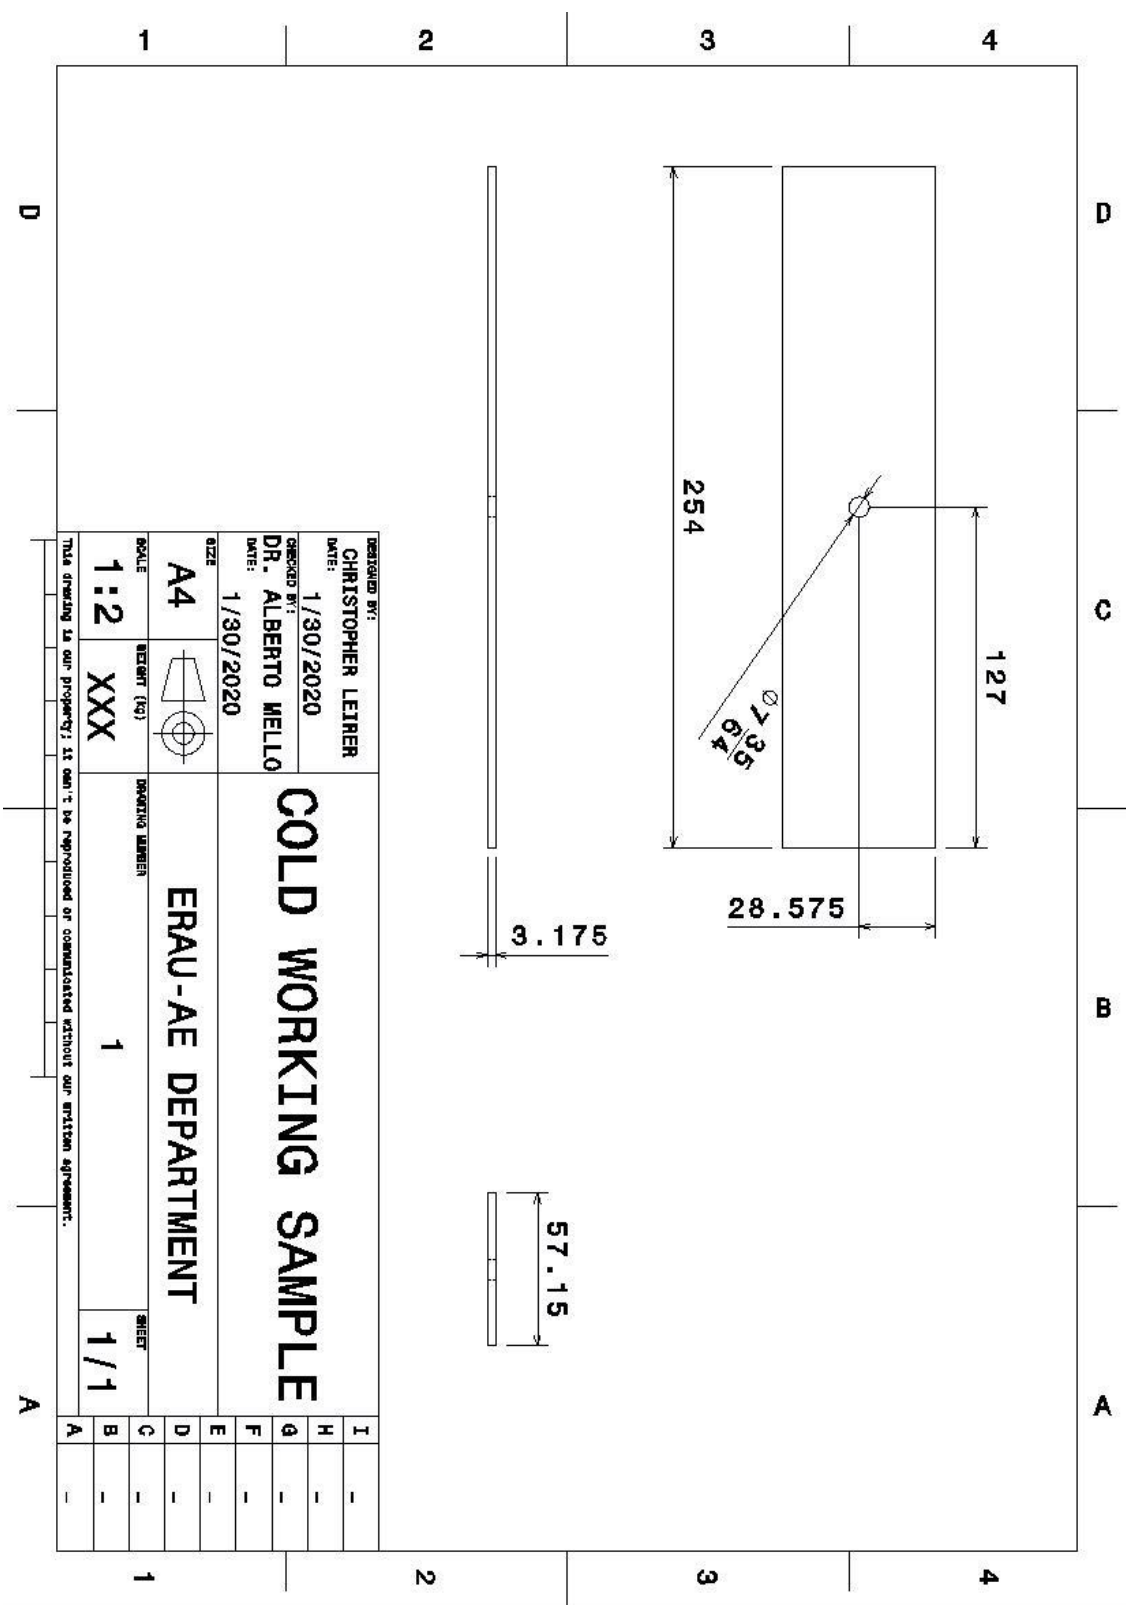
Full scale engineering drawings of specimen dimensions provided to the Embry-Riddle Manufacturing Shop for specimen manufacturing.
